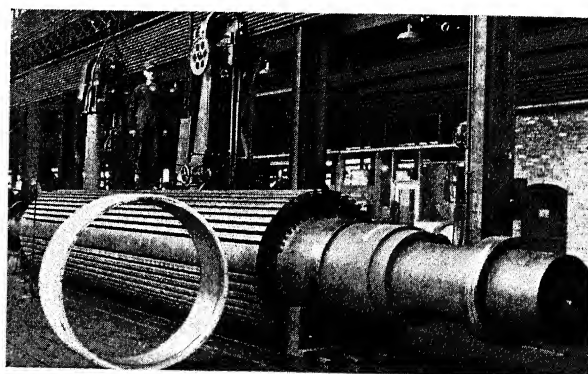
ROTOR CORE AND SHAFT AFTER SLOTTING
